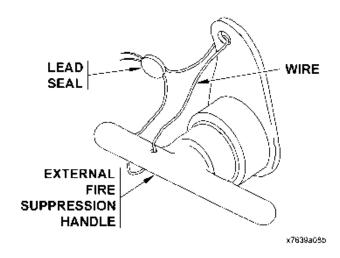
External Fire Extinguisher Handle Wire and Lead Seal (Front).
